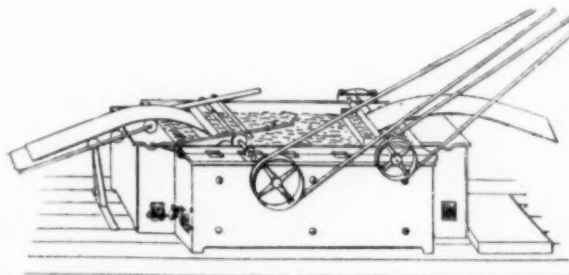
HEATHFIELD SHEET GALVANIZING MACHINE.
